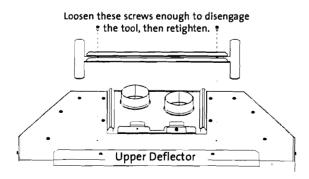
Remove the Flue Collar tool. Also, remove the Upper Deflector if a Cast Iron surround is to be installed.
